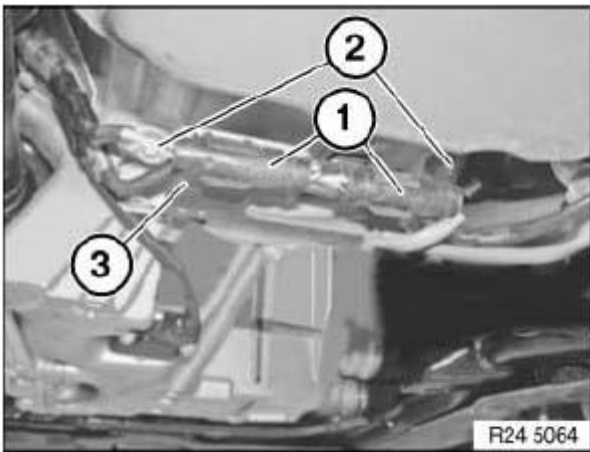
Identifying Retaining Plate, Plug Connector And Screws
